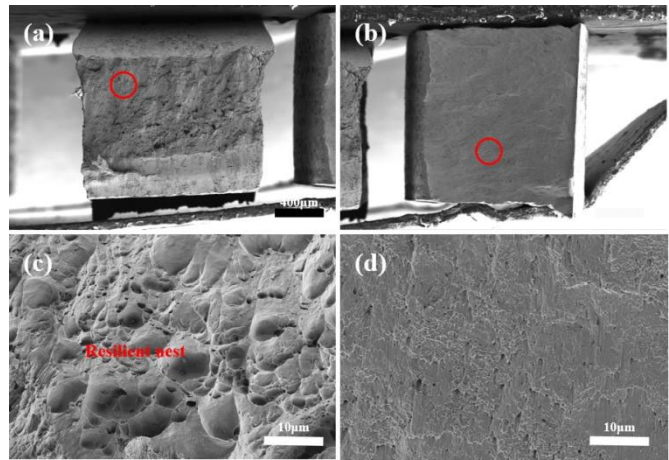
Macroscopic and microscopic morphologies of the fracture surface of Al15Ti0: (a) heat-affected zone; (b) cladding layer; (c) magnified view of the area circled in white in (a); (d) magnified view of the area circled in white in (b)
